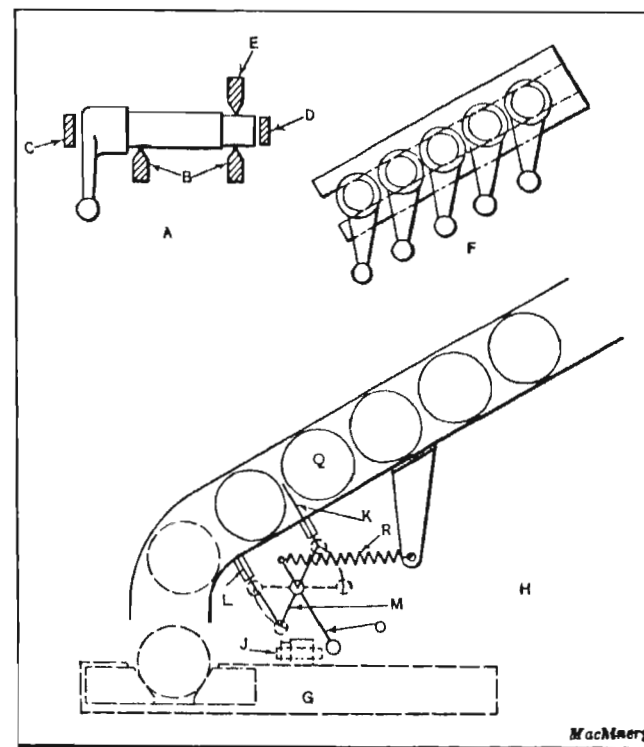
Design for Handling the Topheavy Forging C, Fig. 1
